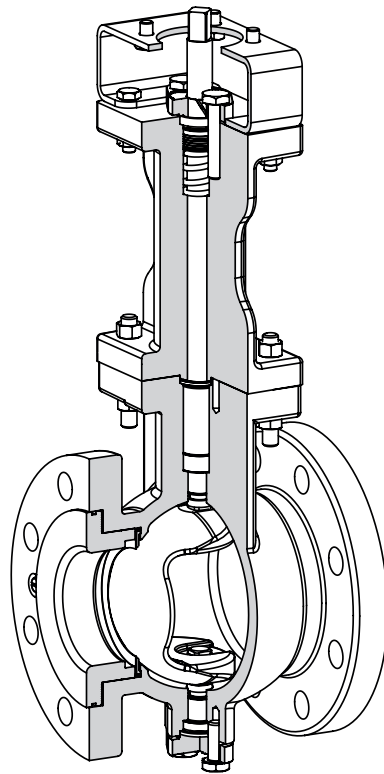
Insulating section for Type 3310 Segmented Ball Valve
